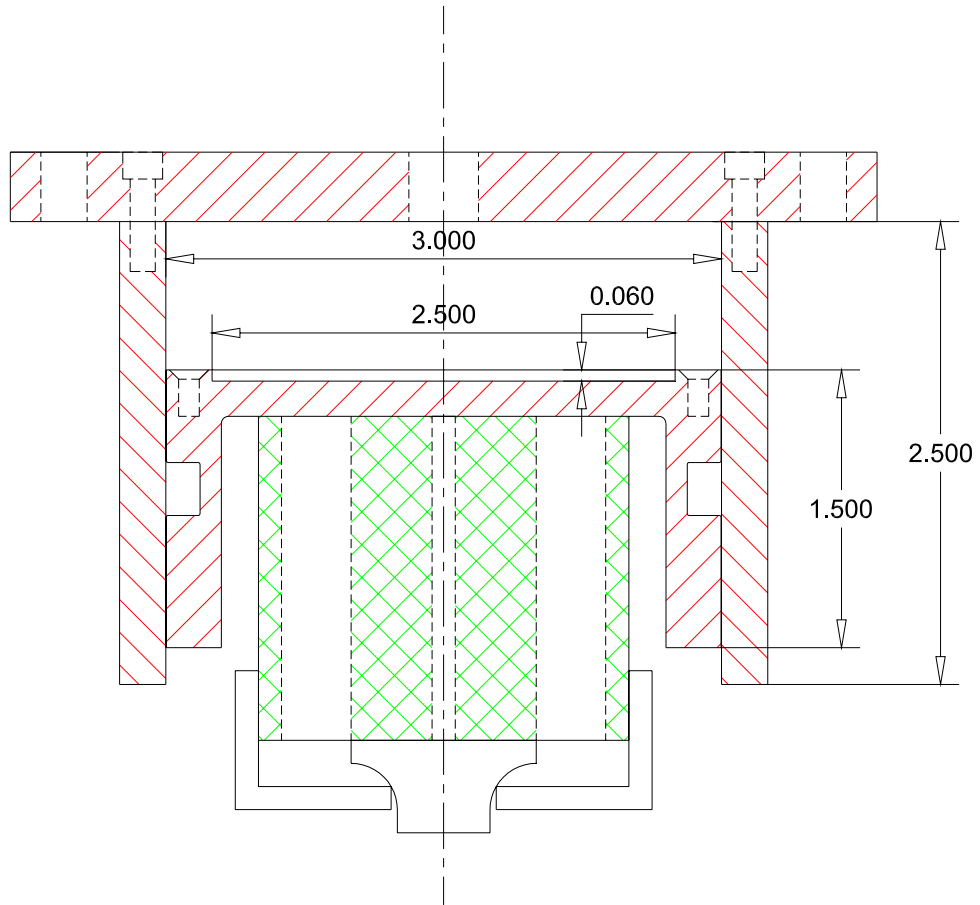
Assembly view of the CHAMP reactor setup. All dimensions are in inches.
